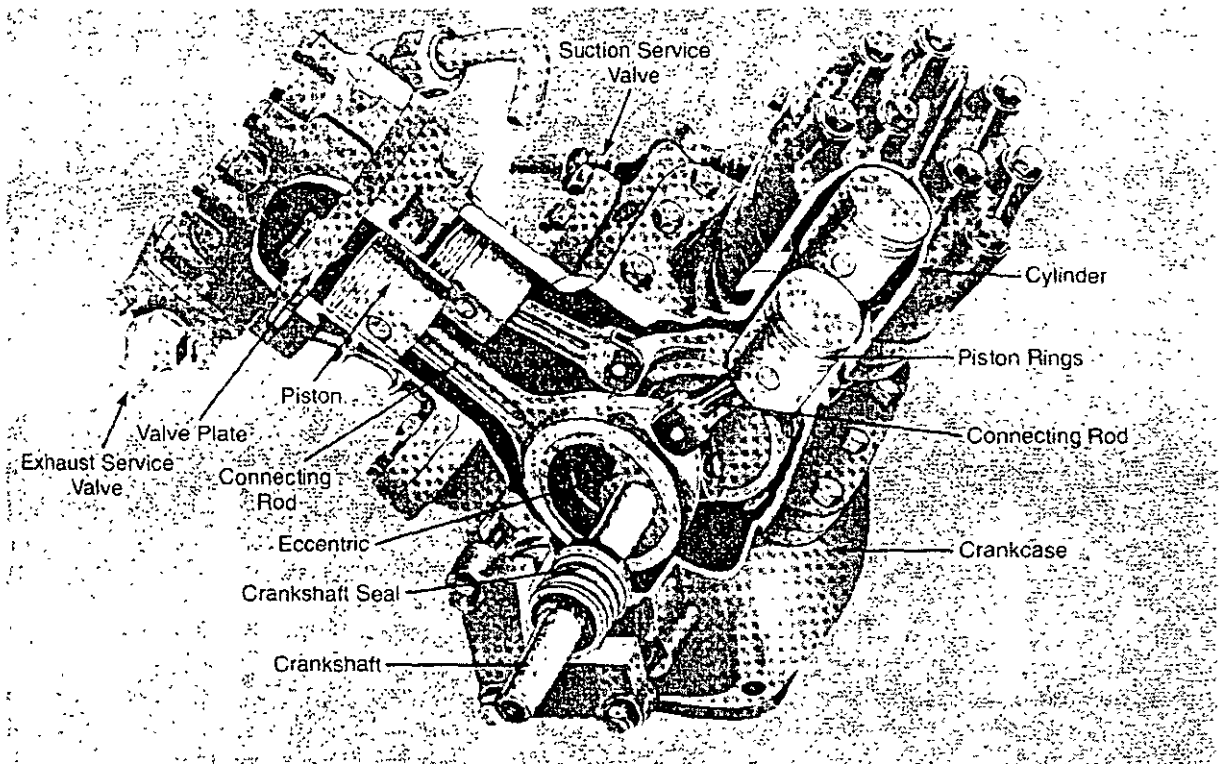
A four-cylinder, external-drive, V-type, air cooled compressor. (Frick Co.)
